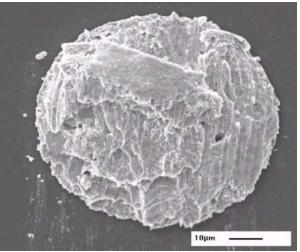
Bump Shear Surface of Enhanced Eutectic SnPb2.5Cu Solder Bump
